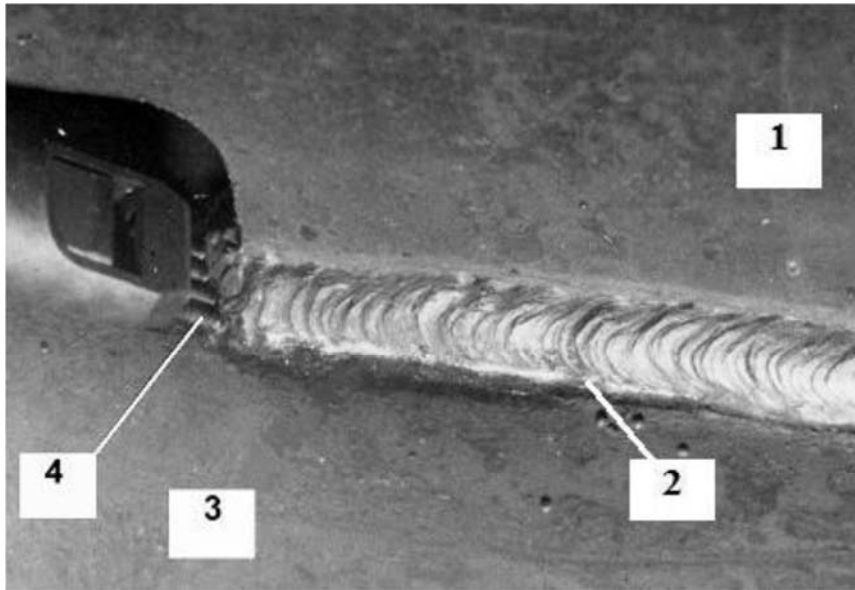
Photo of the “groove” produced by ultrasonic impact treatment of the end of welded stiffener published in 1989 [2]: 1 – welded stiffener, 2 – “groove” produced by UIT/UP, 3 - base plate, 4 – strikers of UIT tool
